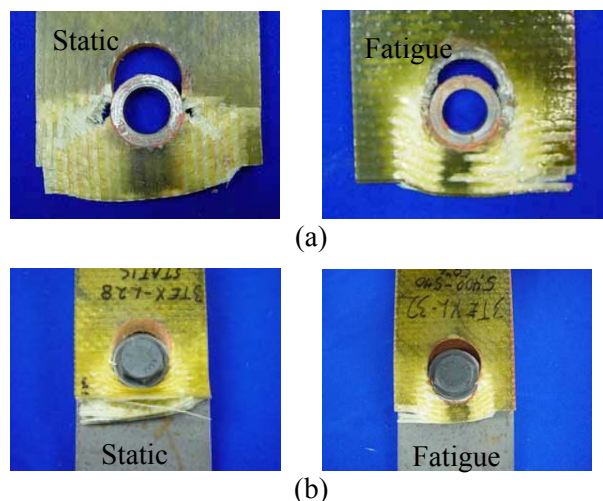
Typical joint static and fatigue failure mode observed for (a) the cylindrical steel insert and (b) the tapered steel insert composite/steel lap assemblies.
